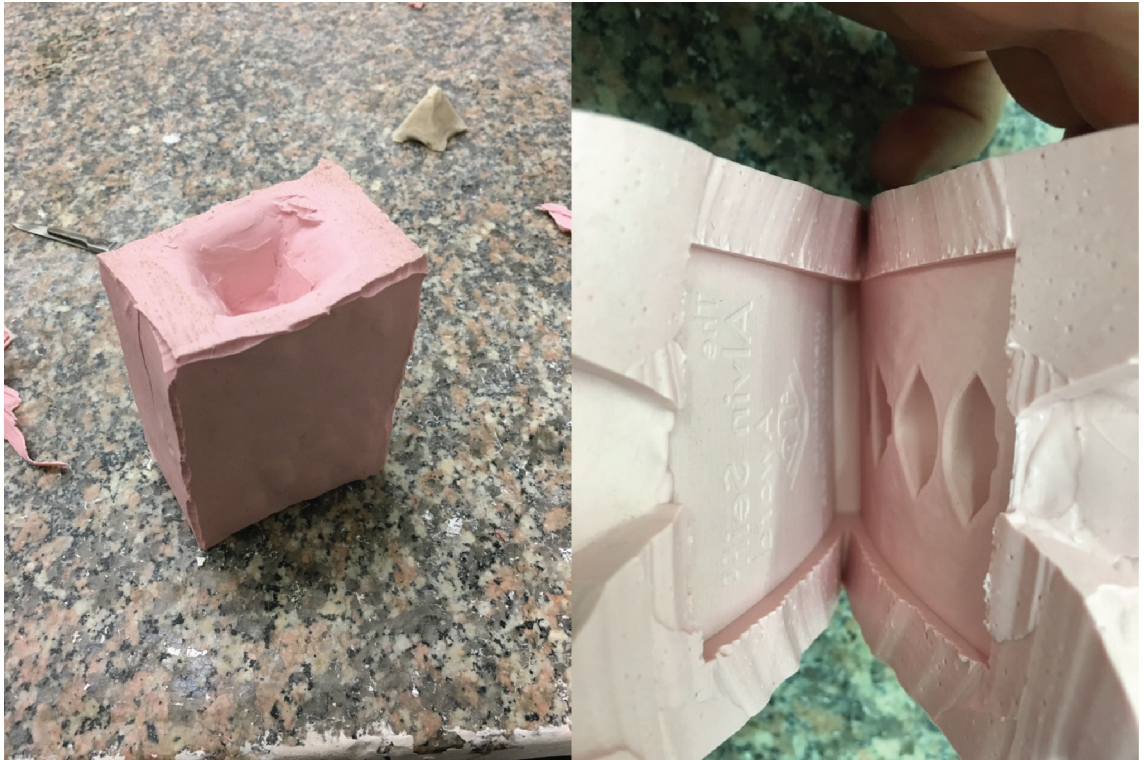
(left) Silicone mold. (right) The silicone mold is cut open, master model removed, ready to create wax models.
